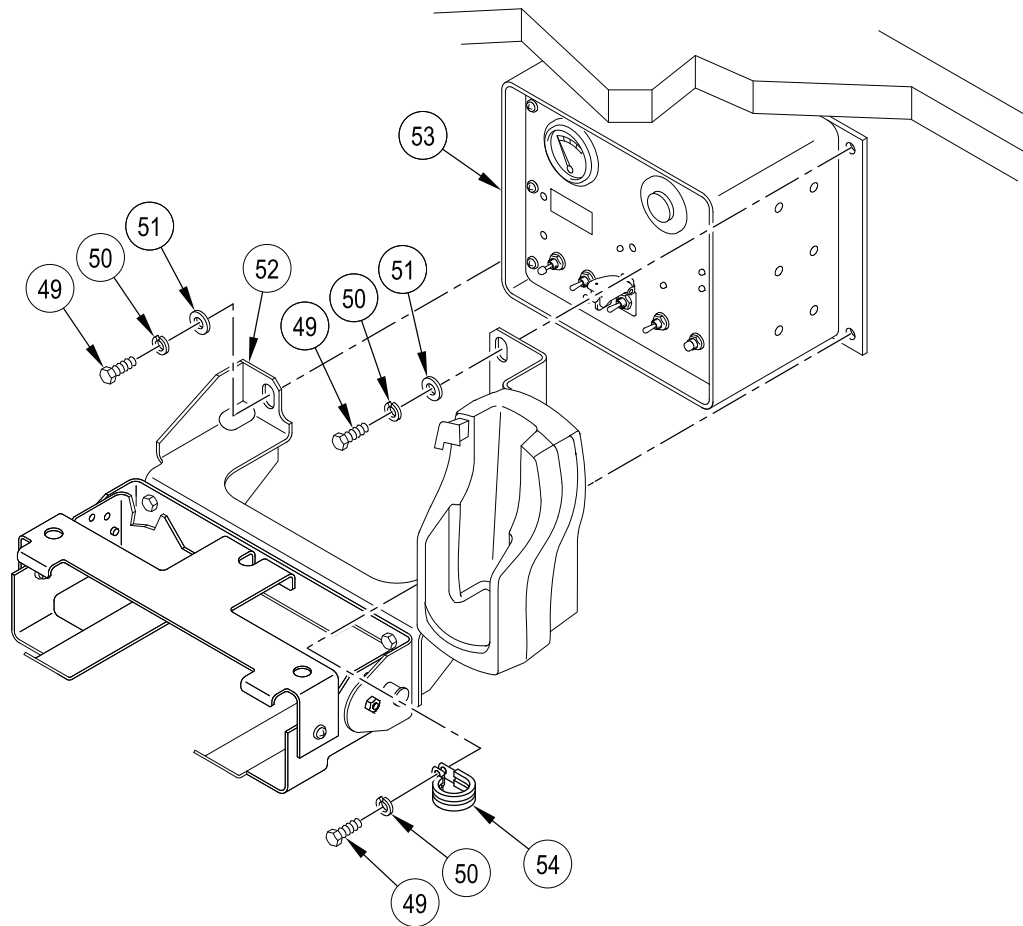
RCU/PDA Bracket Assembly Installation (M1068A3 Only)
